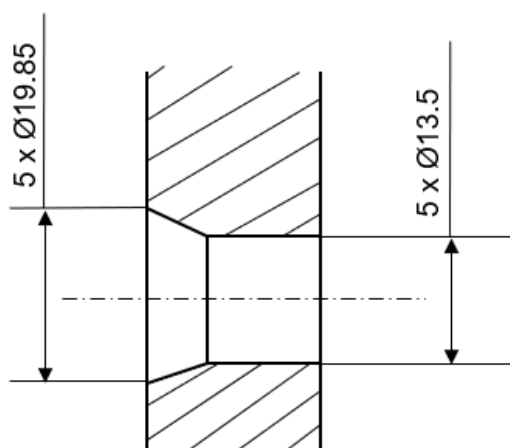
Use a 60° countersink drill bit to make diameter equal or slightly bigger than 19.85 mm.
